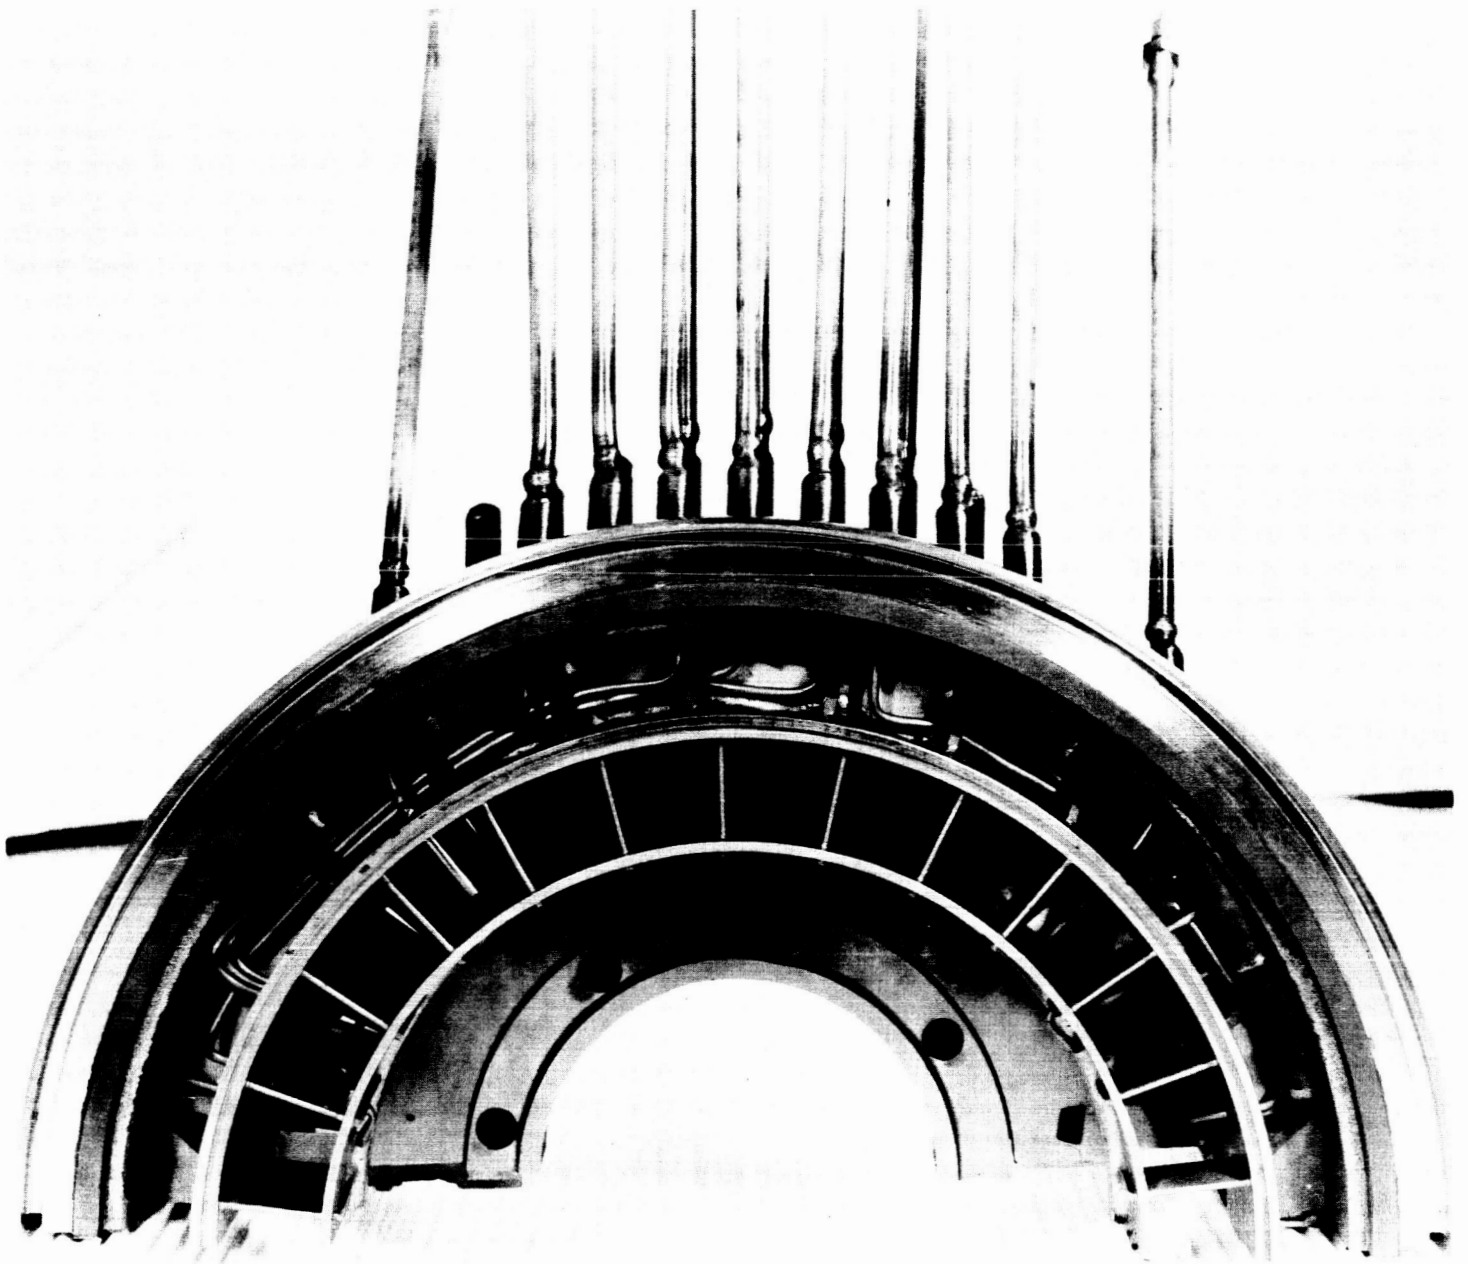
Outlet Guide Vane-Casing Assembly with Welded Pressure Taps Installed.
